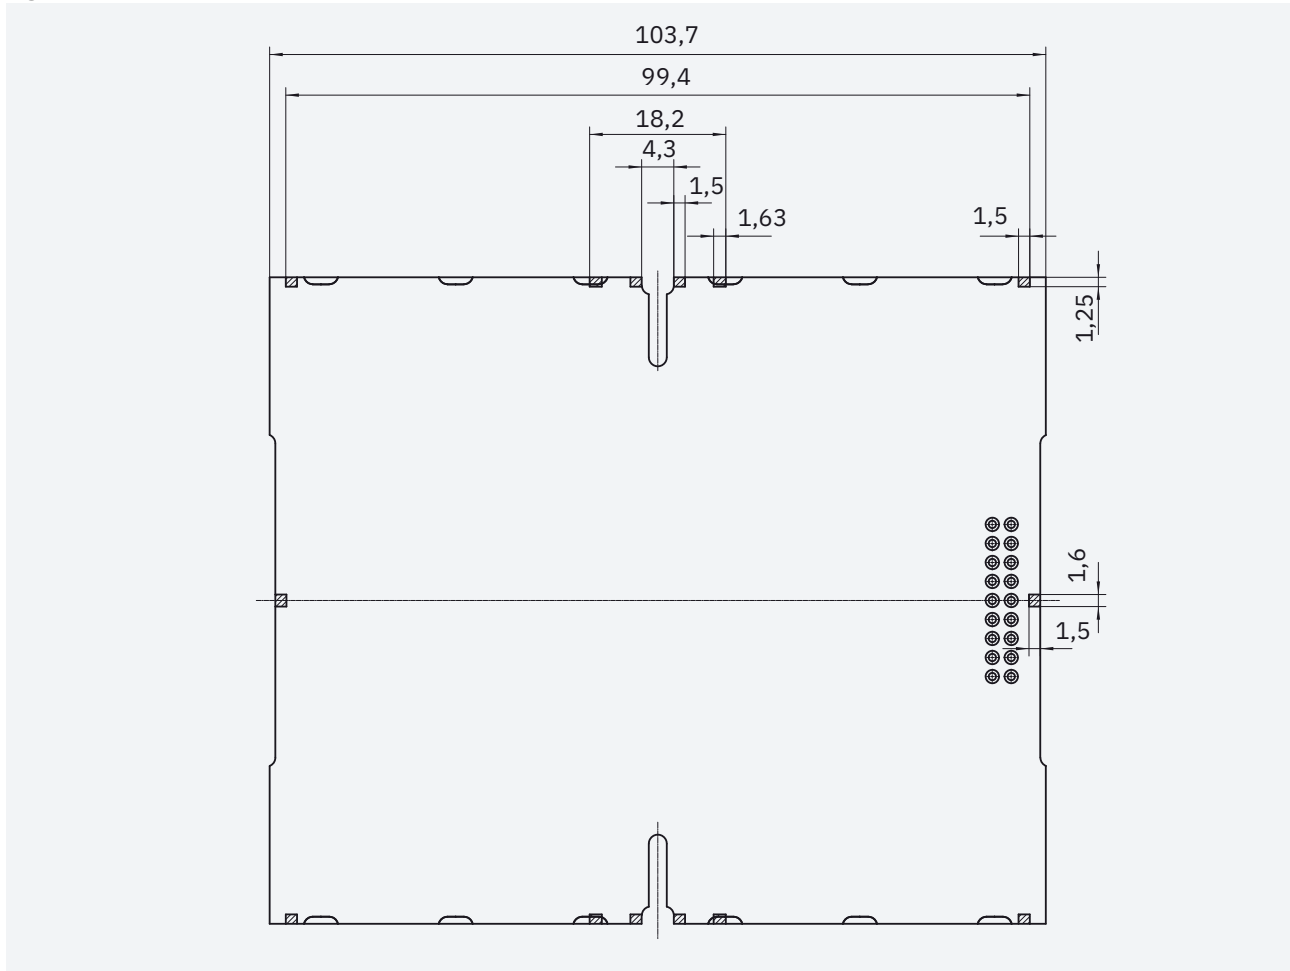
Dimensions of PCB 1 (BC 107,6) – lower side
